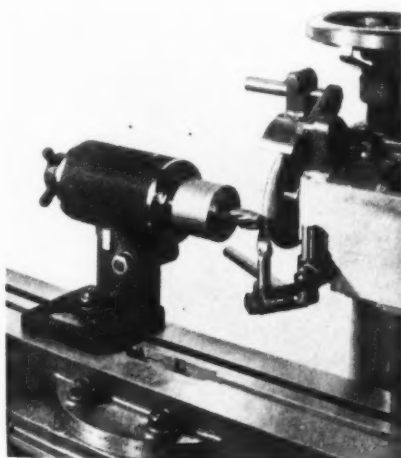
Brown & Sharpe No. 10 End-mill Grinding Attachment
